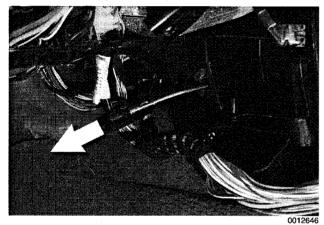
Pull out evaporator sensor from housing in direction of arrow.
